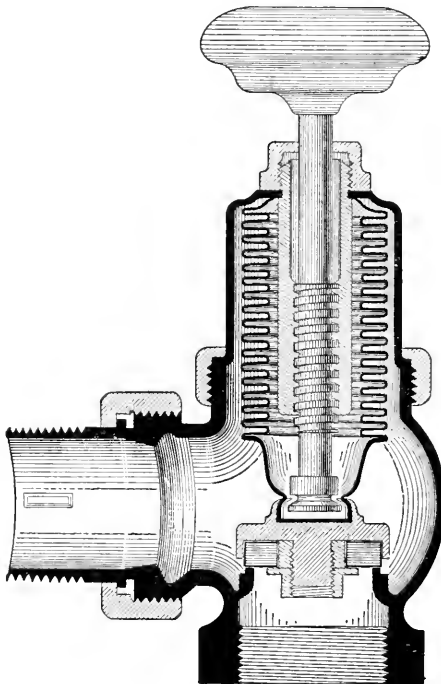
SYLPHON PACKLESS RADIATOR VALVE.
